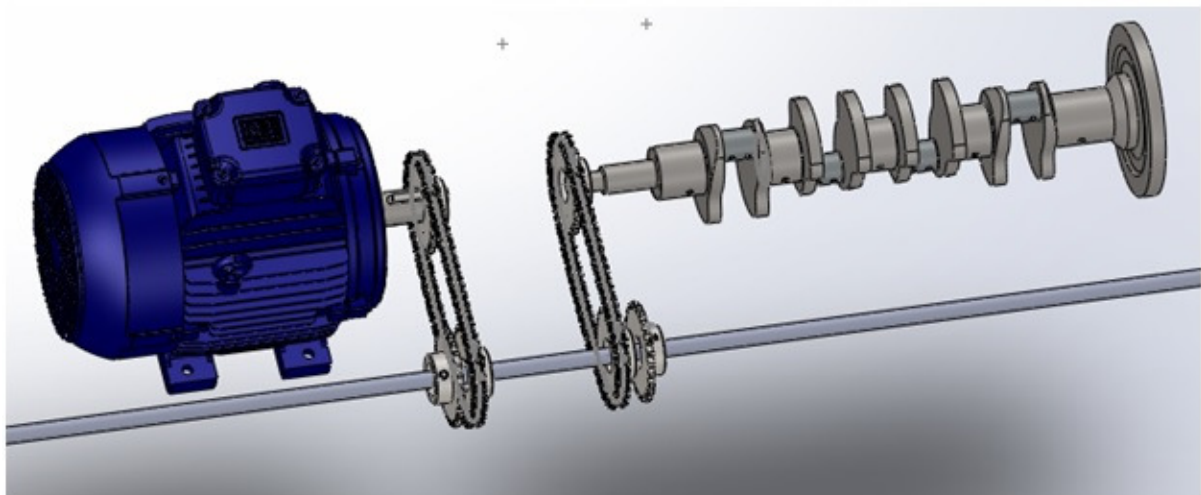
Design of motor and engine wheel drive mechanism (without wheels)
